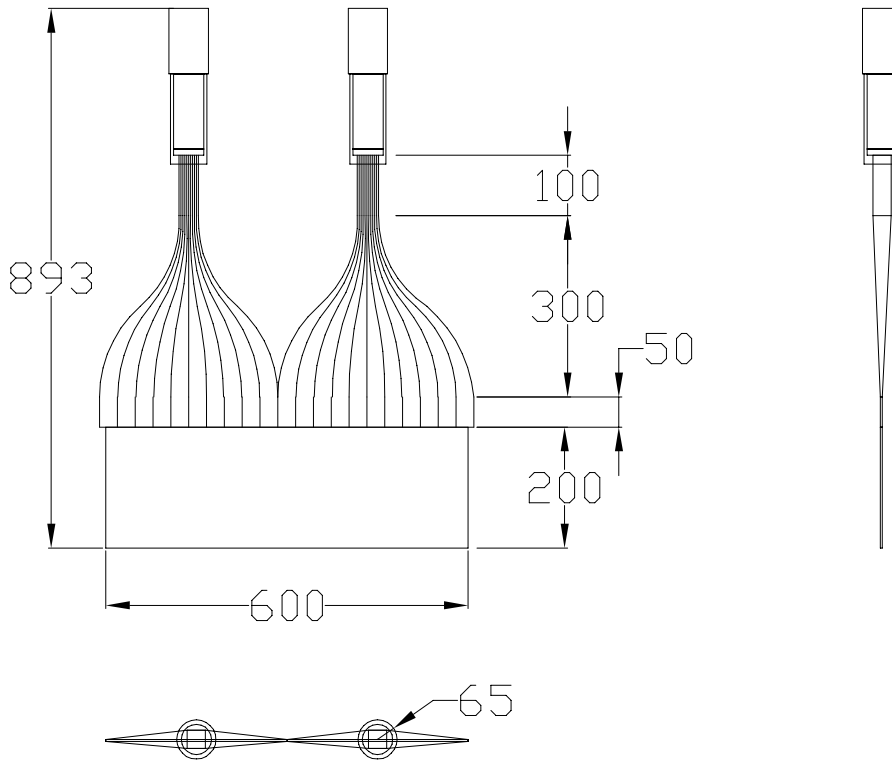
Technical drawing of the H0 detector. A  $600 \times 200 \text{ mm}^2$  scintillator is read out by 2 PMTs.
